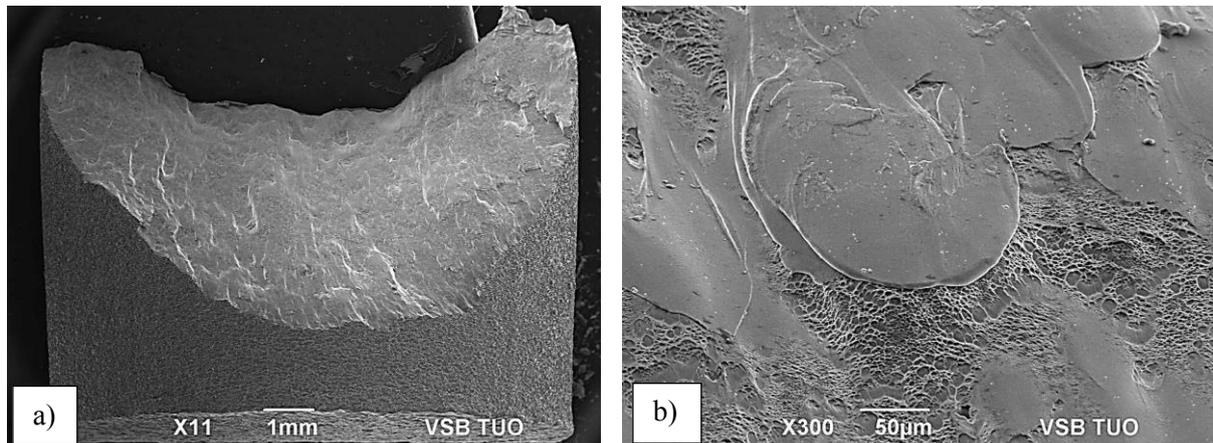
Compression fracture of Ti6Al4V specimen tested in as-built condition: a) view of smooth failure surface, b) detail of mixed feature of fracture with shear areas and ductile dimples.
